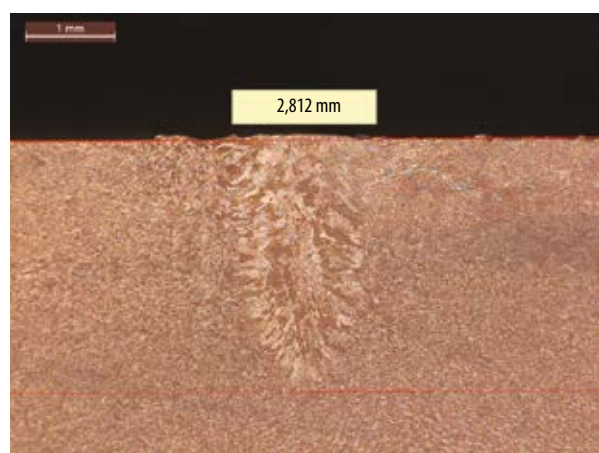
Macrographic of 3 m/min 8 kW copper welding
